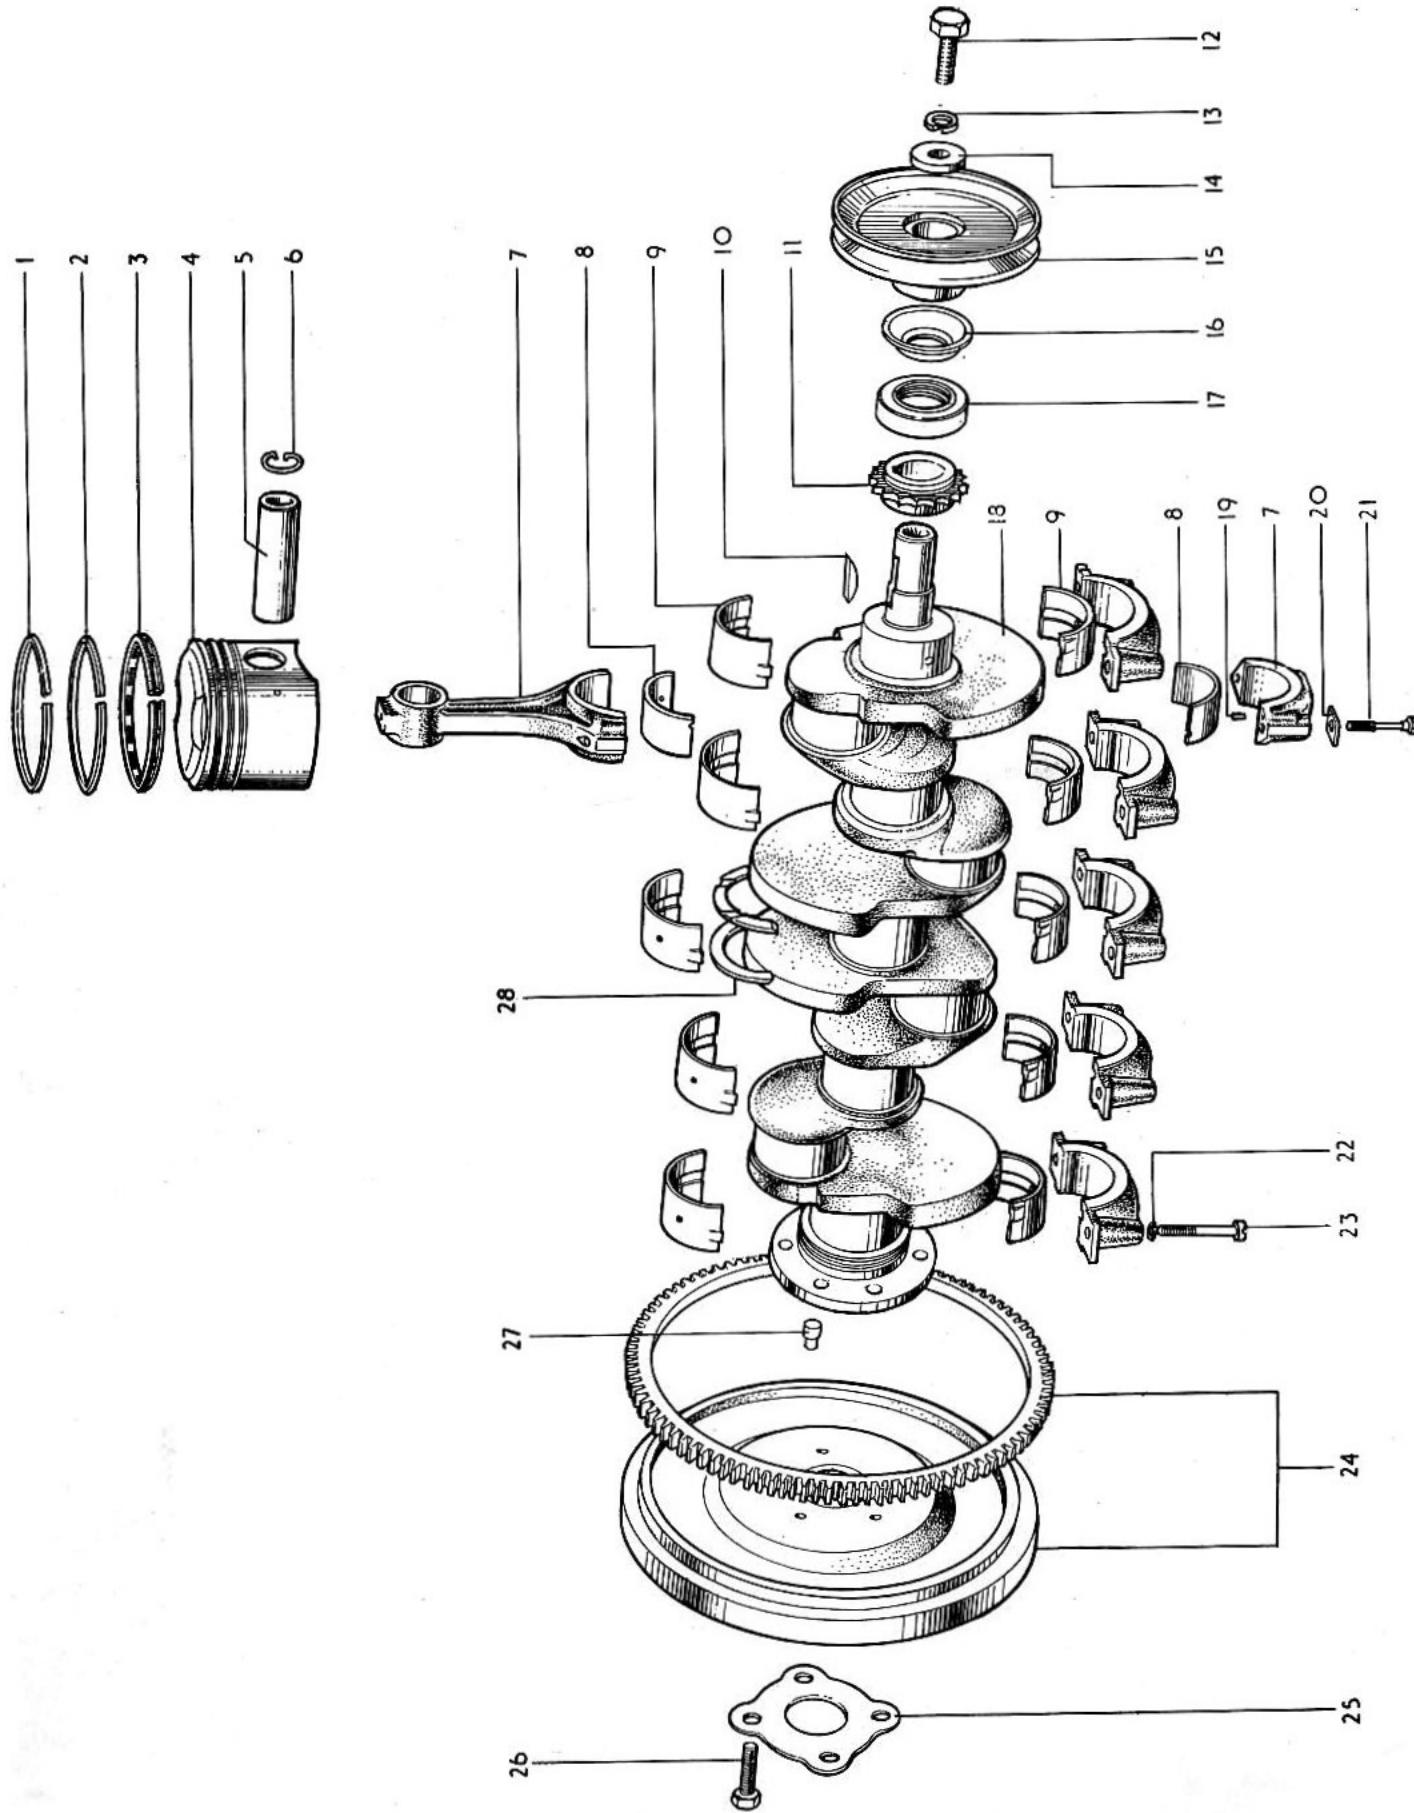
CRANKSHAFT, PISTON AND FLYWHEEL ASSEMBLY COMPONENTS
